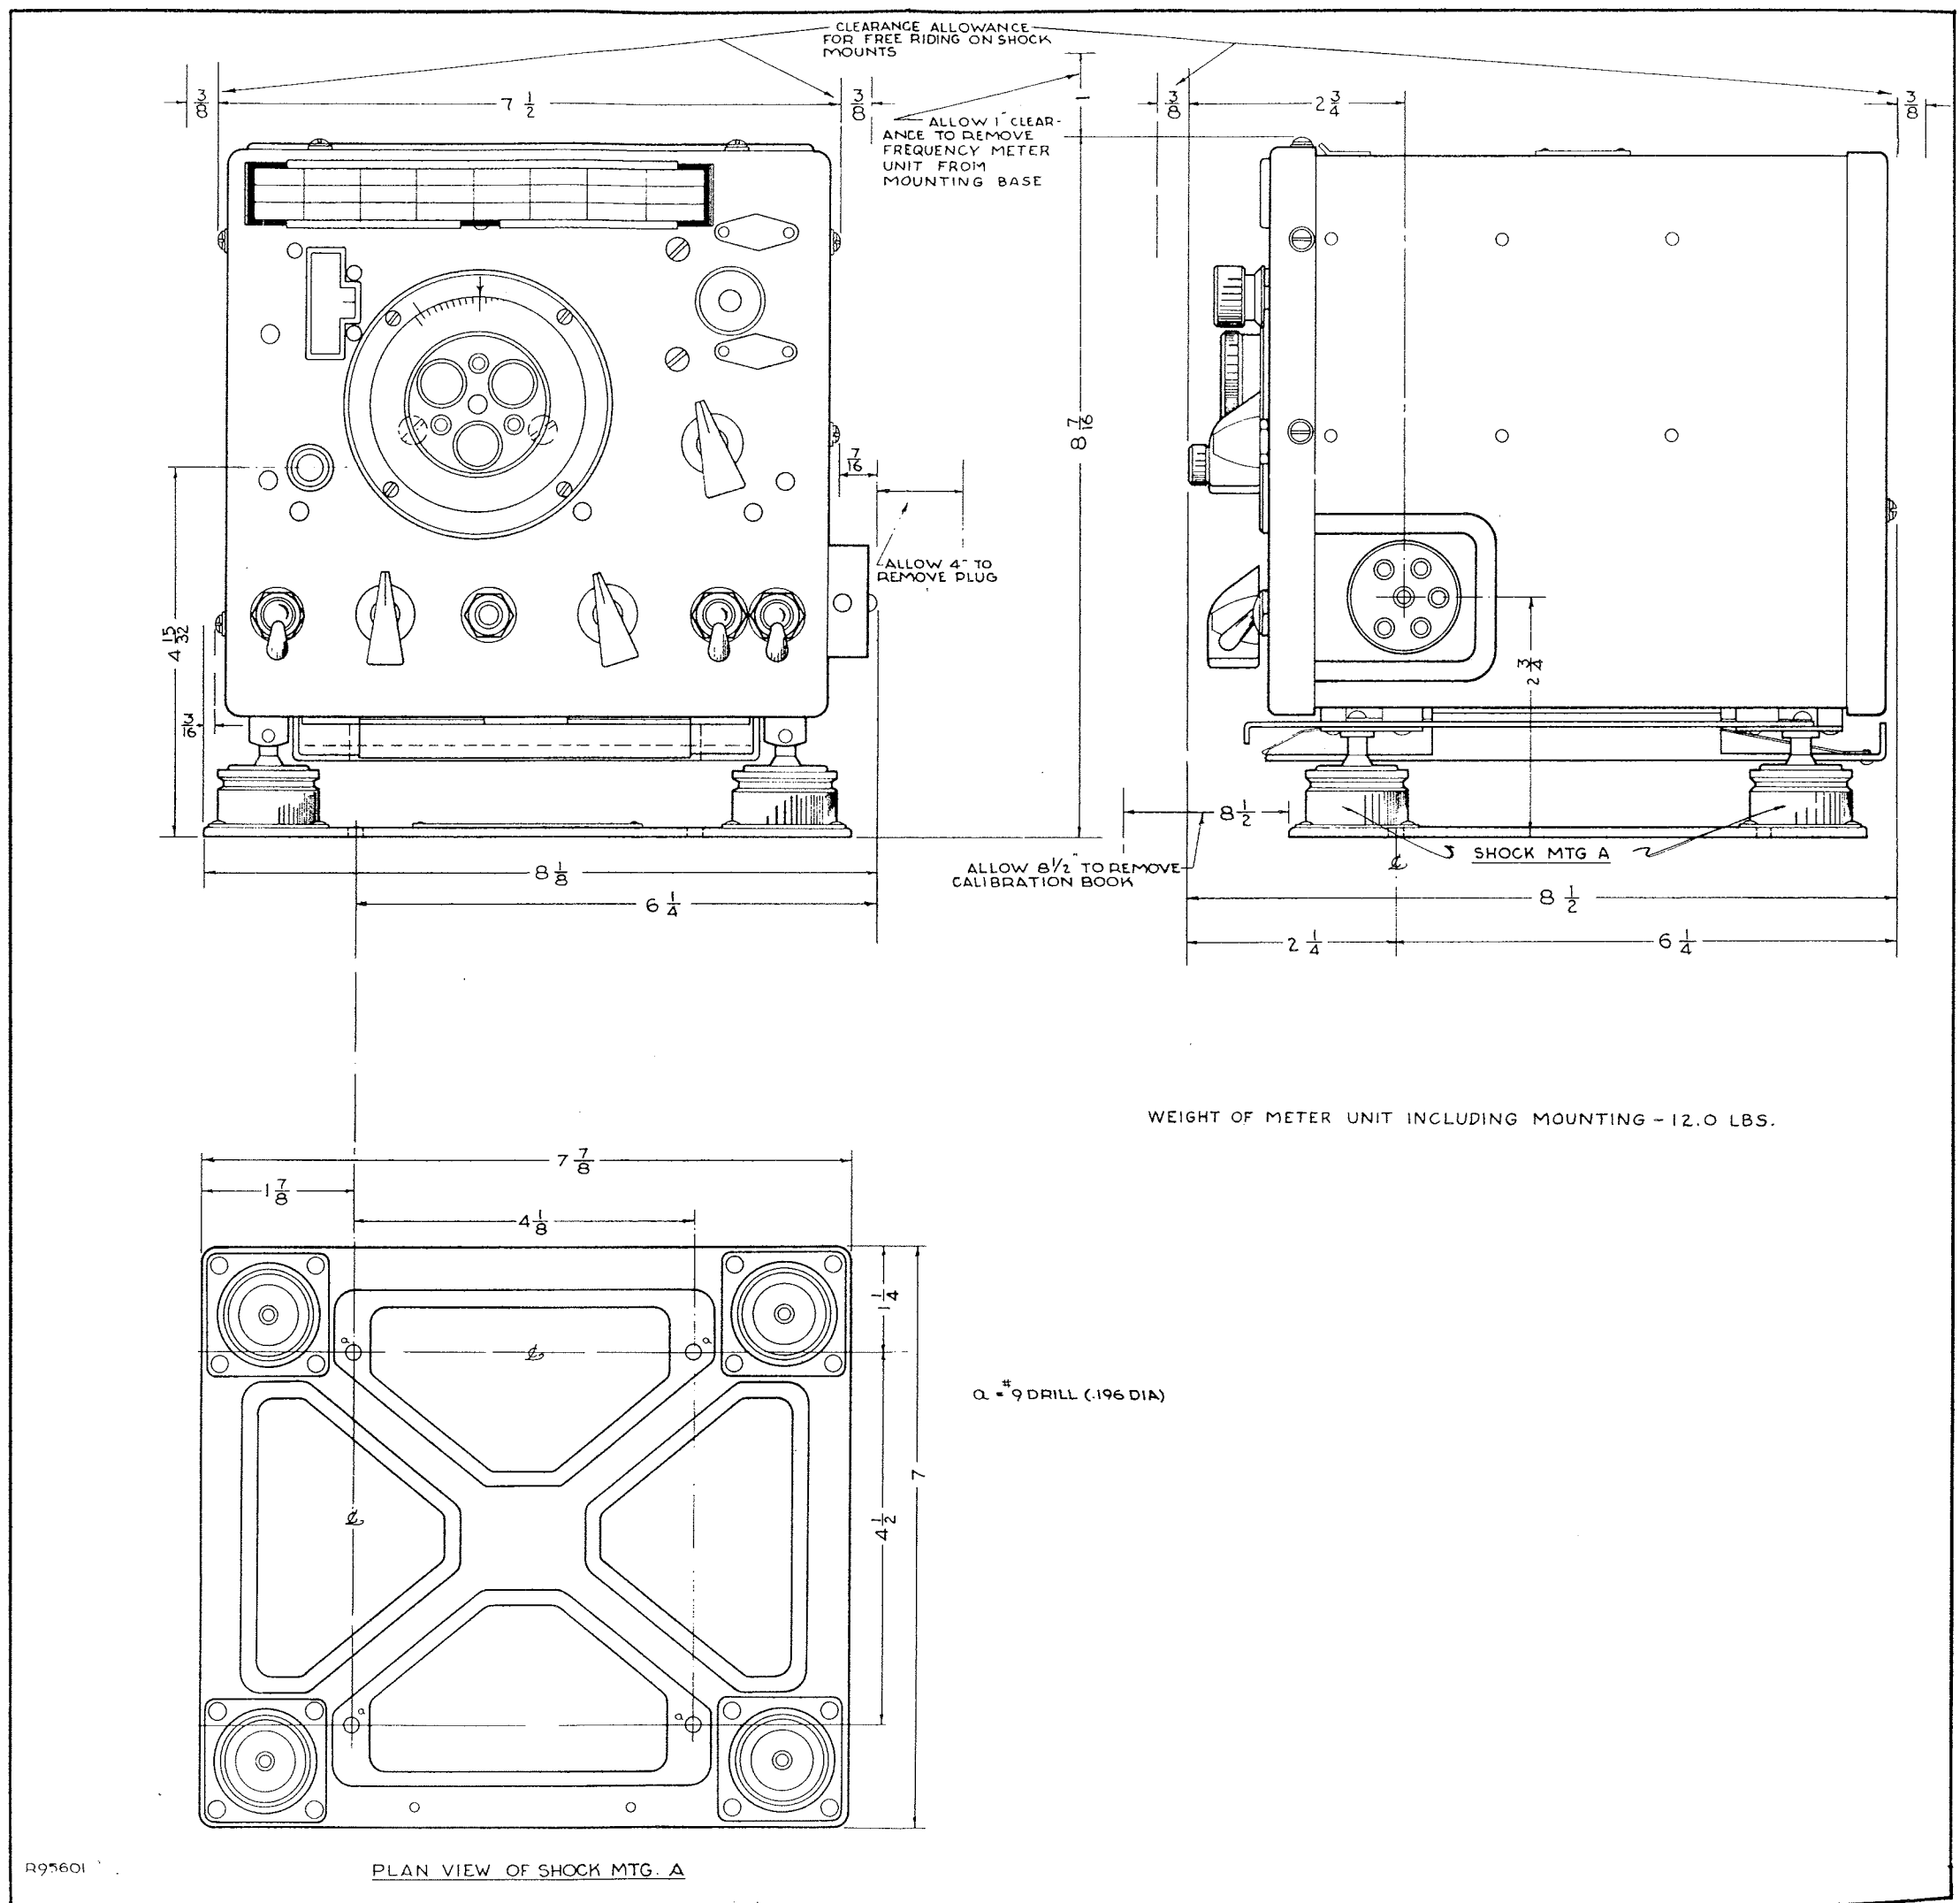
OUTLINE AND MOUNTING DIMENSIONS
